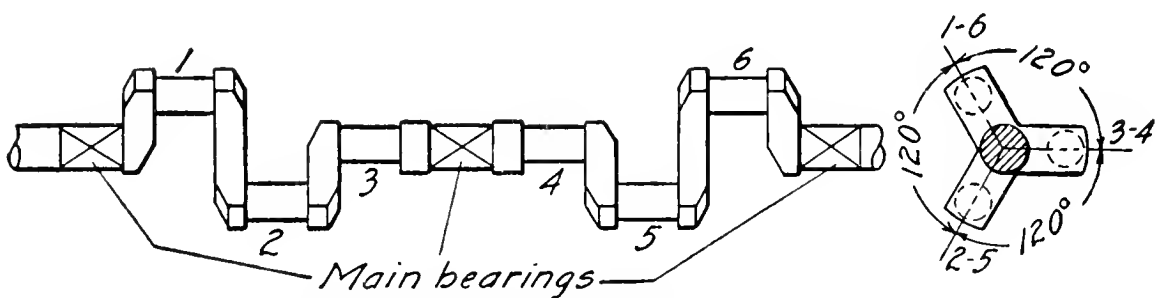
A three-bearing six-cylinder or six-throw crank shaft
